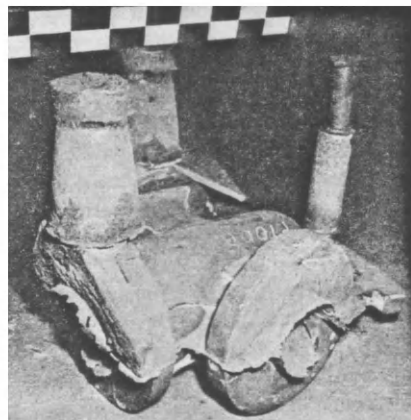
a. Tapered exothermic pads, combined with breaker core, on a valve casing.
